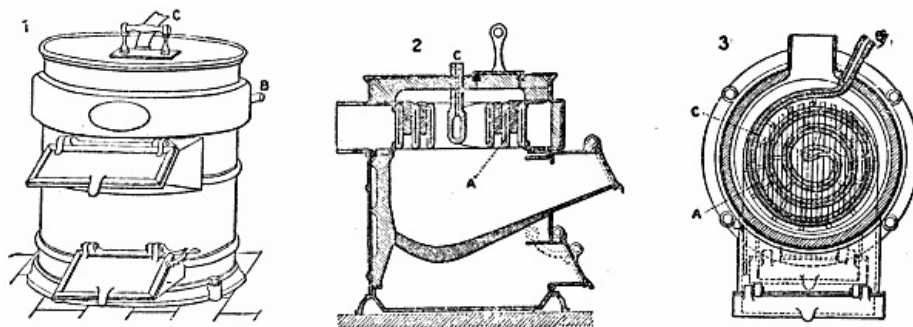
COMPLETE VIEW OF A SERPOLLET BOILER.
